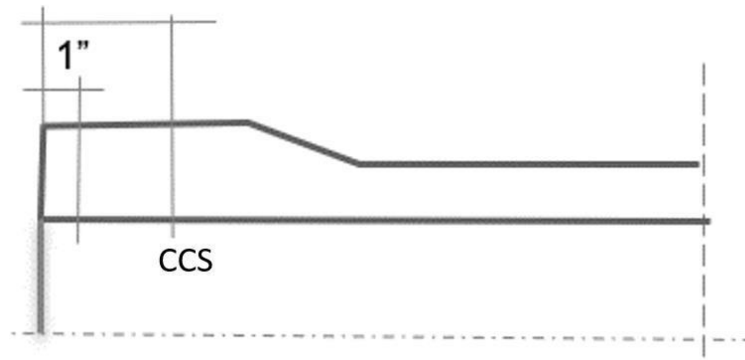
Box Upset connector Dimensional Measurement Locations
